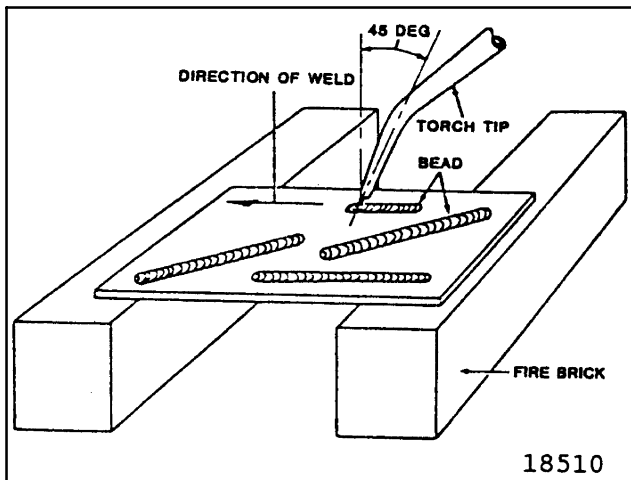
Welding Beads Without a Welding Rod
